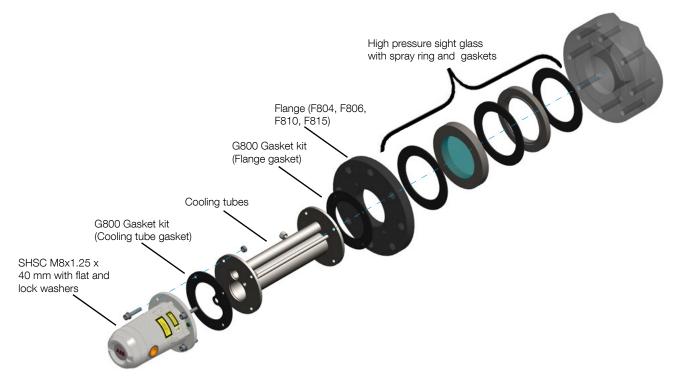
6. LM80 laser level transmitter with P802 cooling tubes and HPSG
